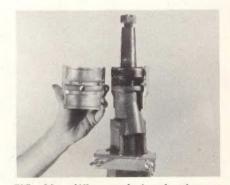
When replacing bearing on this type axle outside race must be used. Be sure to use puller head that fits outside race. Lock head and press bearing on axle.
